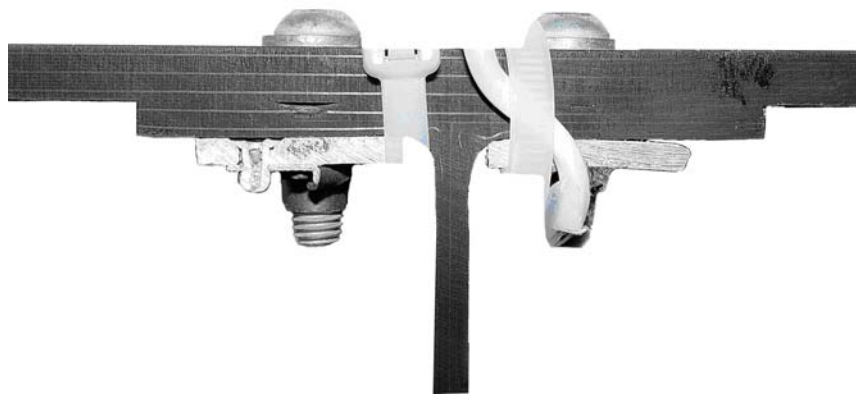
Example cross section of joint from Specimen Set 2 (pretest)
